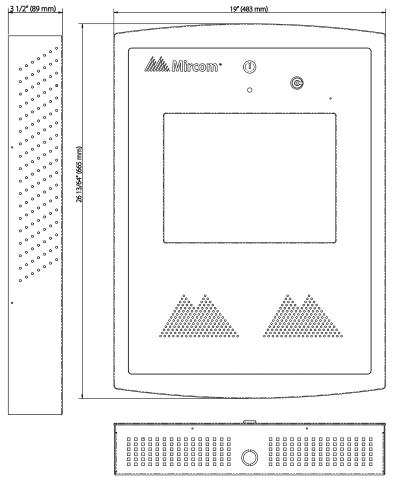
Dimensions of the 15" Surface Mount Touch Screen
